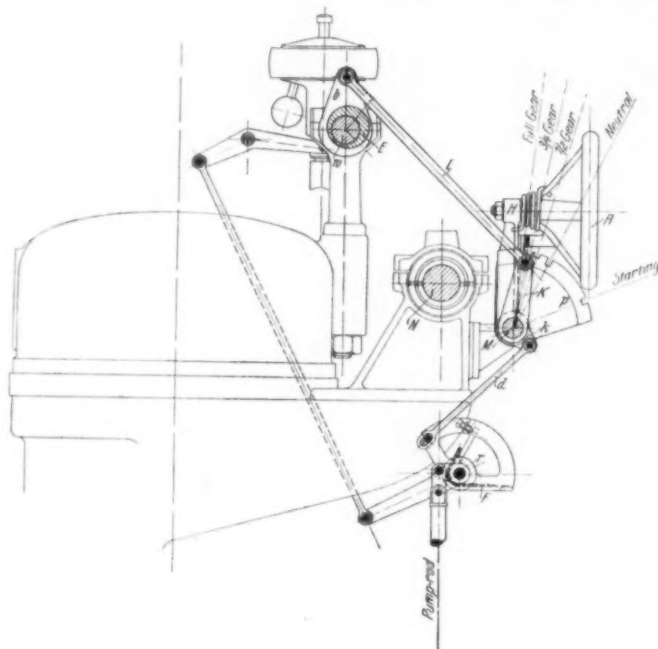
CAM LIFTING AND GOVERNING GEAR
